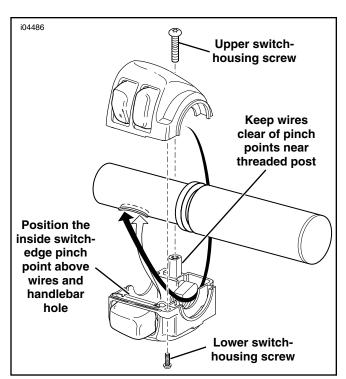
Switch-Housing Wire Routing (Right-Side Housing Shown)
